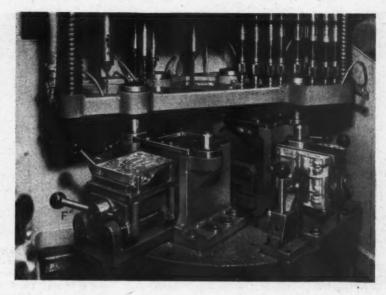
Various holes are drilled and tapped in all three machined faces of the upper valve body casting on this 6-station Mulhead machine. Two pairs of fixtures are mounted on the table
